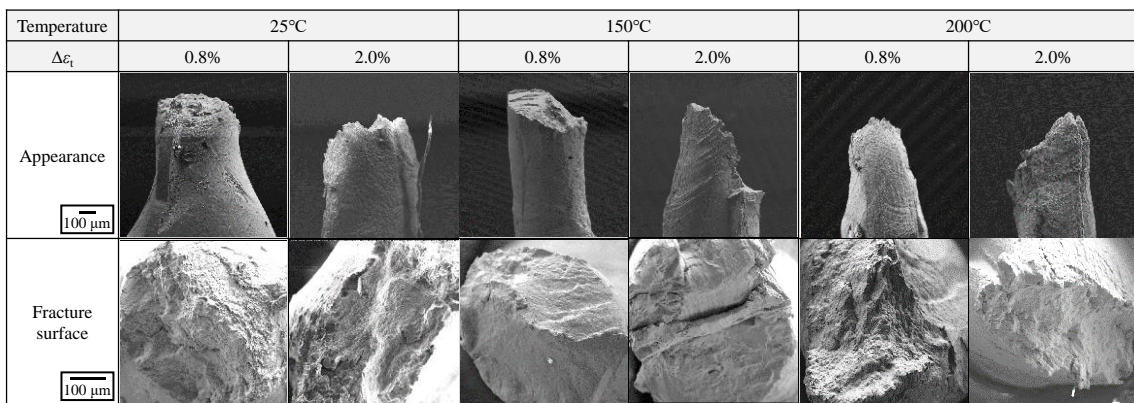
3. 8 Secondary electron images of fracture specimens after low cycle fatigue test of Sn-10Sb.
